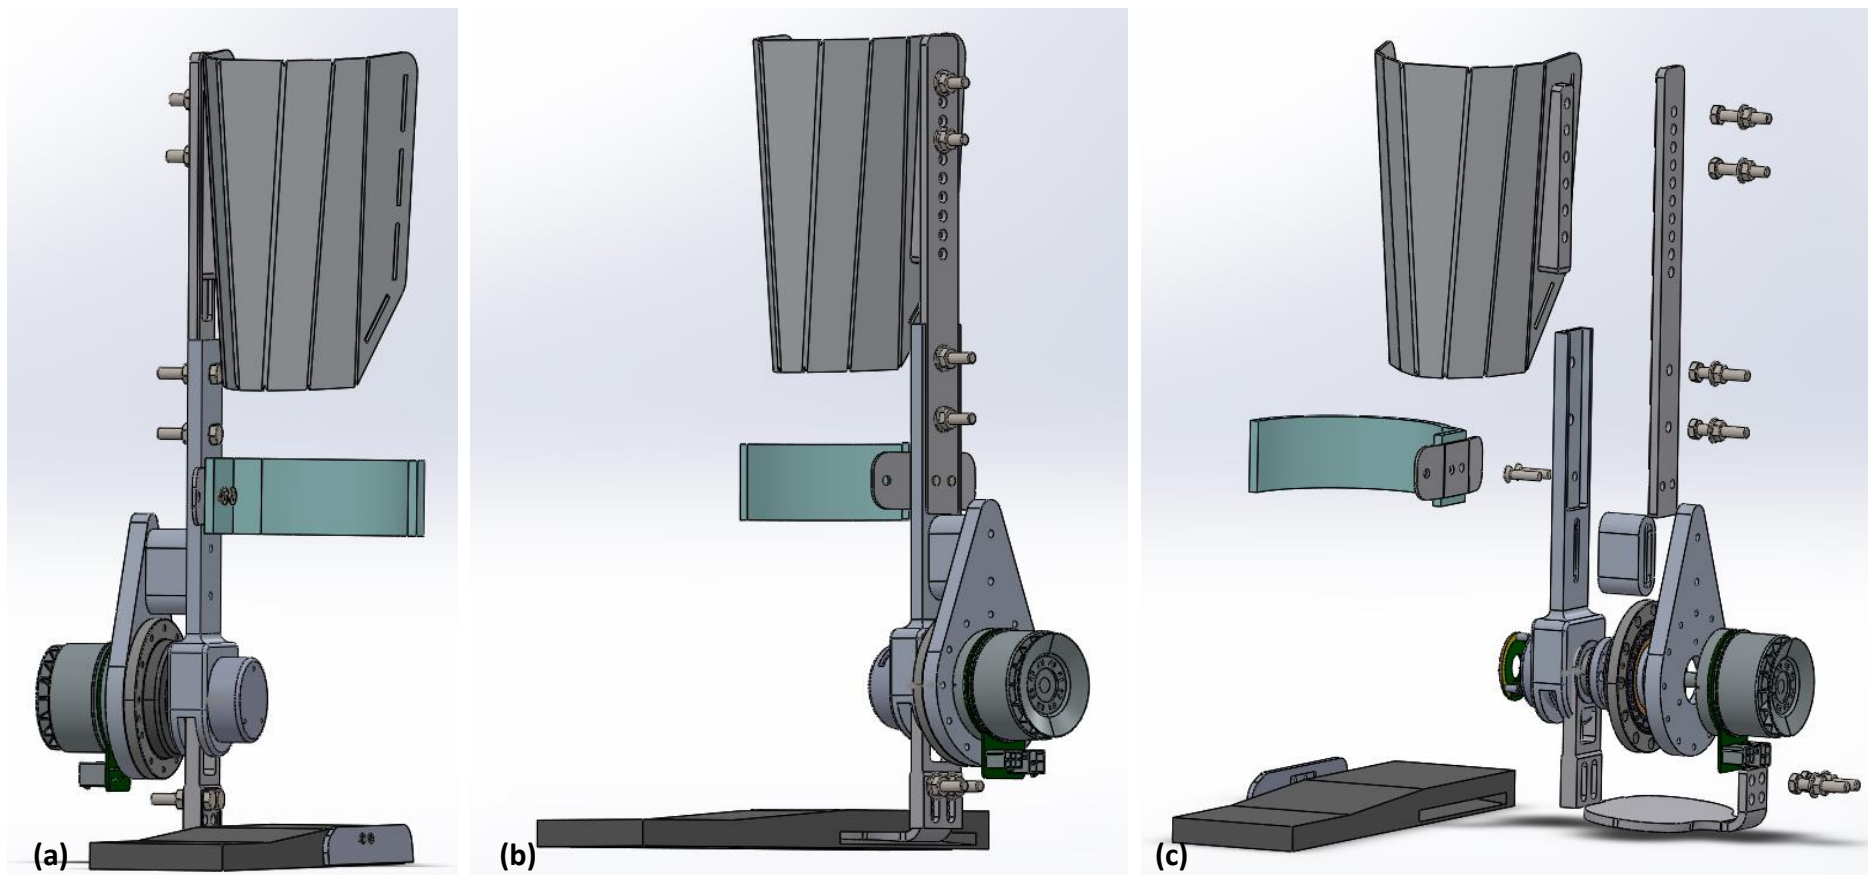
SmartOs standard wearable active orthosis CAD model: (a) Isometric view of the assembly for the right ankle, (b) Isometric view of the assembly for the left ankle, and (c) Exploded view of the assembly for the left ankle.
